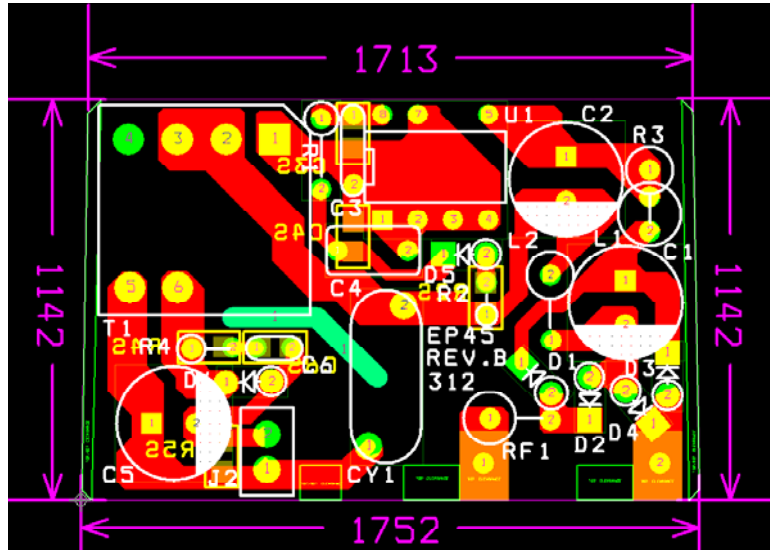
PCB Layout and Dimensions (0.001 inch)
